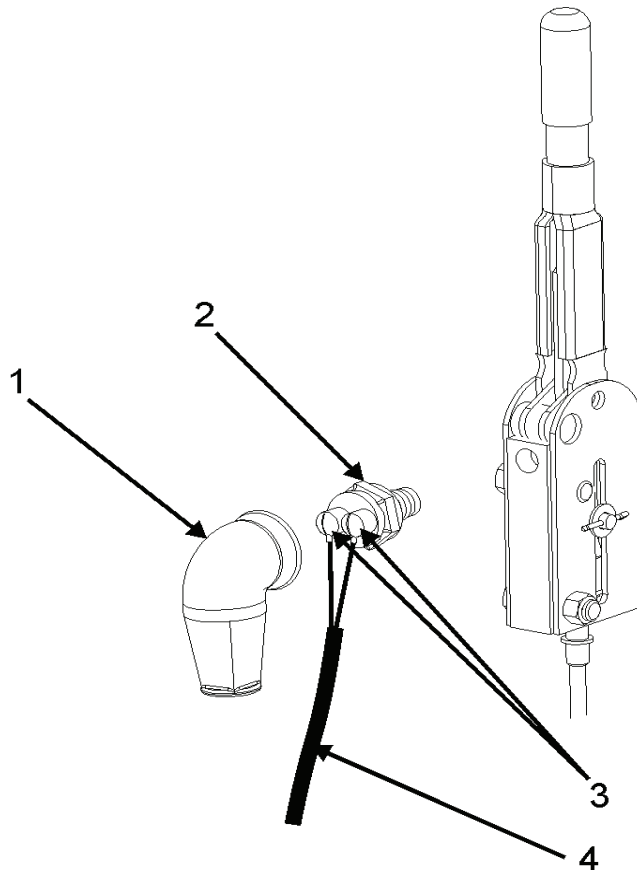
Hand Brake Limit Switch (Removal and Installation)
